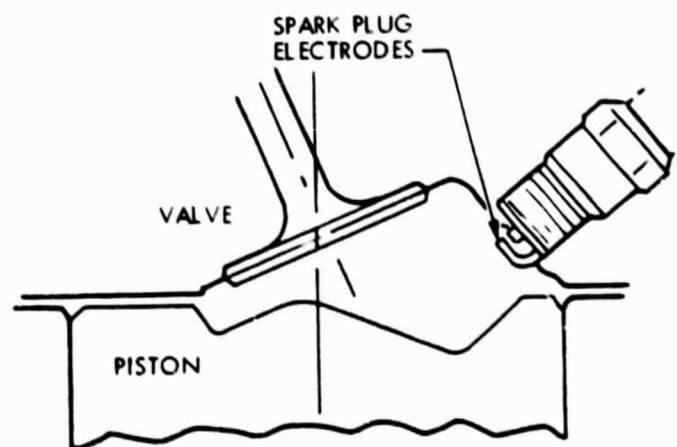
Modified Wedge Chamber Has Been Employed in Turbocharged Version of Pontiac 4.9-L V-8 Engine (Ref. 49)
